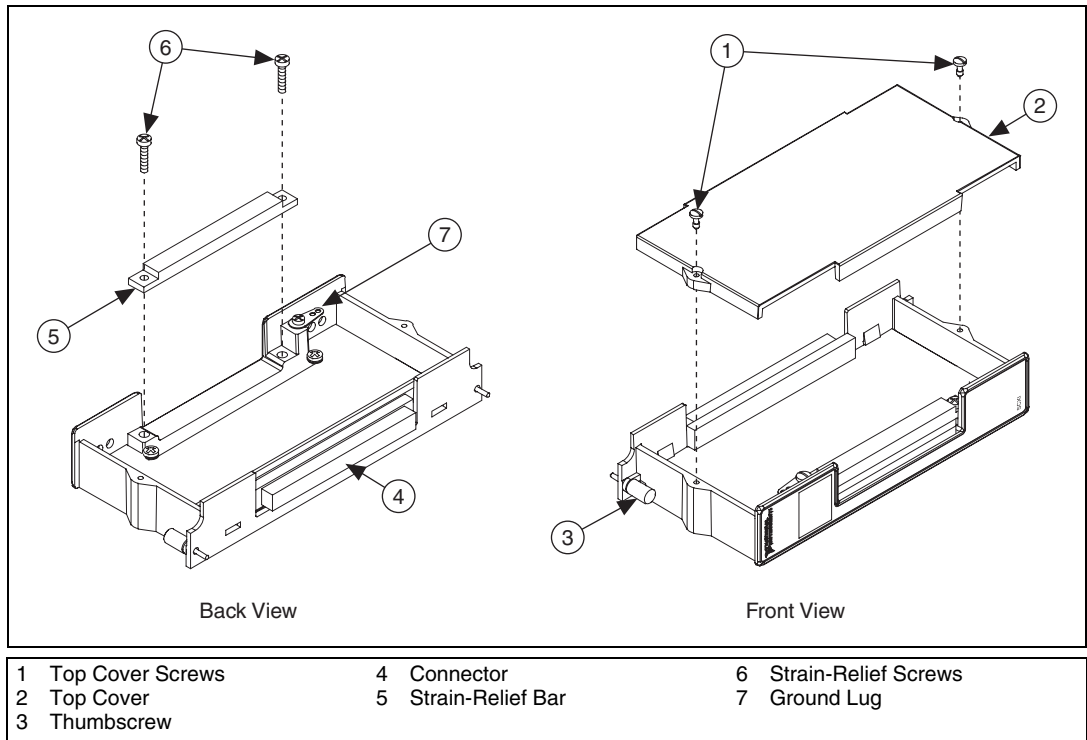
SCXI-1306 Enclosure Parts Locator Diagram
